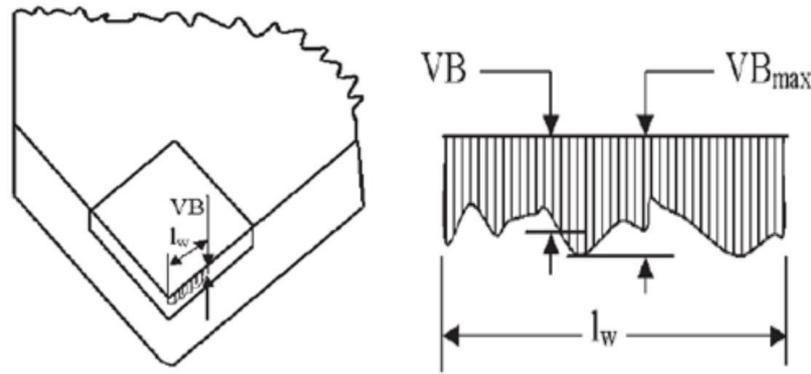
(a) Flank wears on a turning tool(b) Flank wear profile
